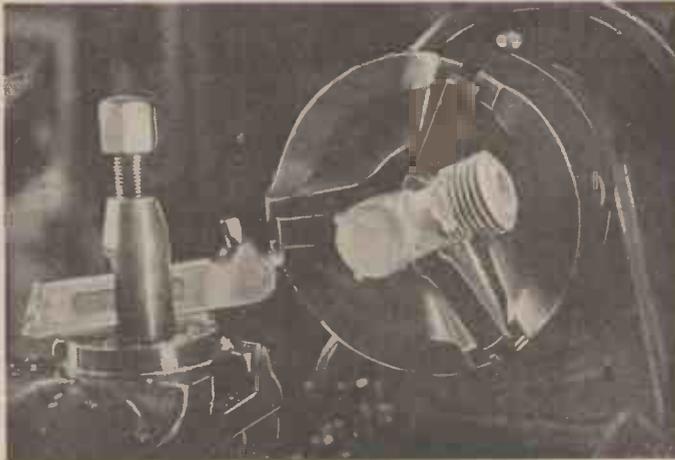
The crankcase mounted on a turned peg for finishing second crankcase face.
